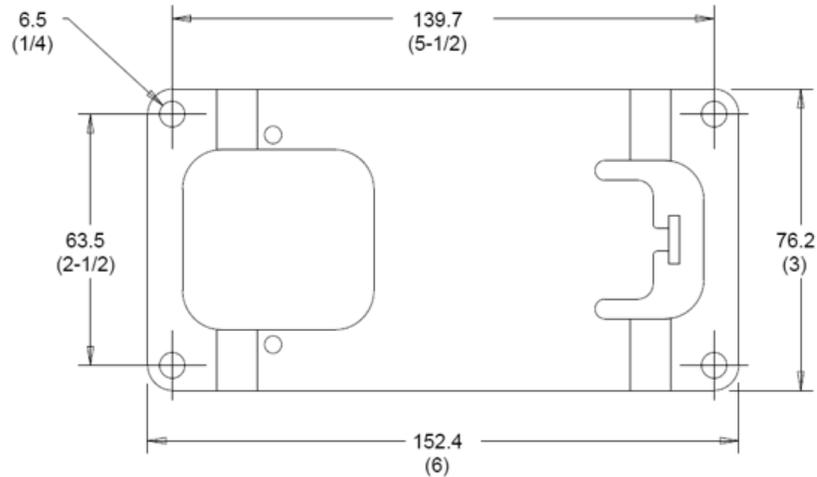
Hole Patterns in Mounting Brackets with Dimension, mm (in.)
